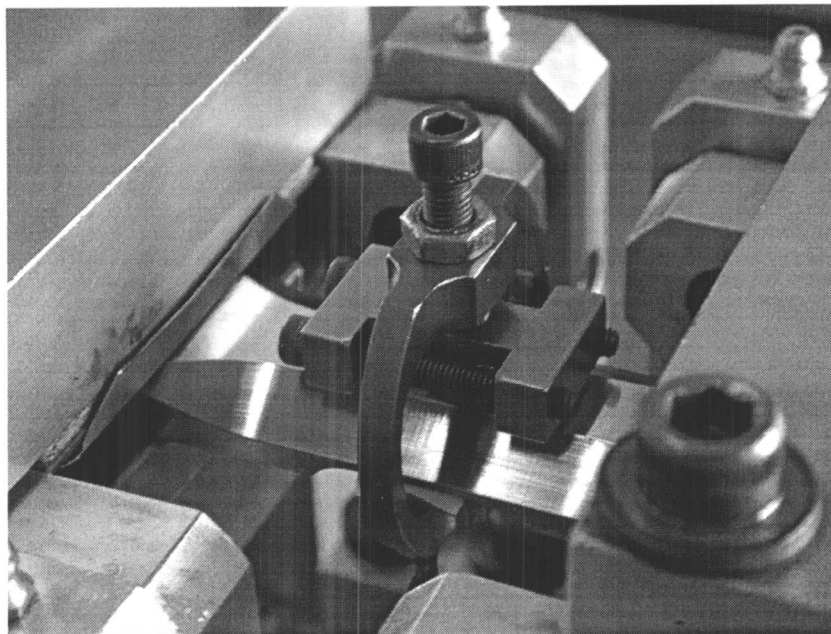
Photograph of the fretting fixture showing the top two fretting rods clamped onto the top surface of the thick section HCF specimen
